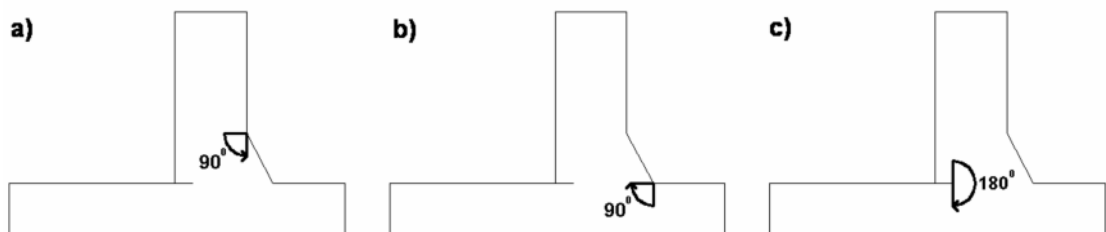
Crack Inclination Angle Ranges a) Crack at Weld Toe 1 b) Crack at Weld Toe 2 c) Crack at Weld Root
